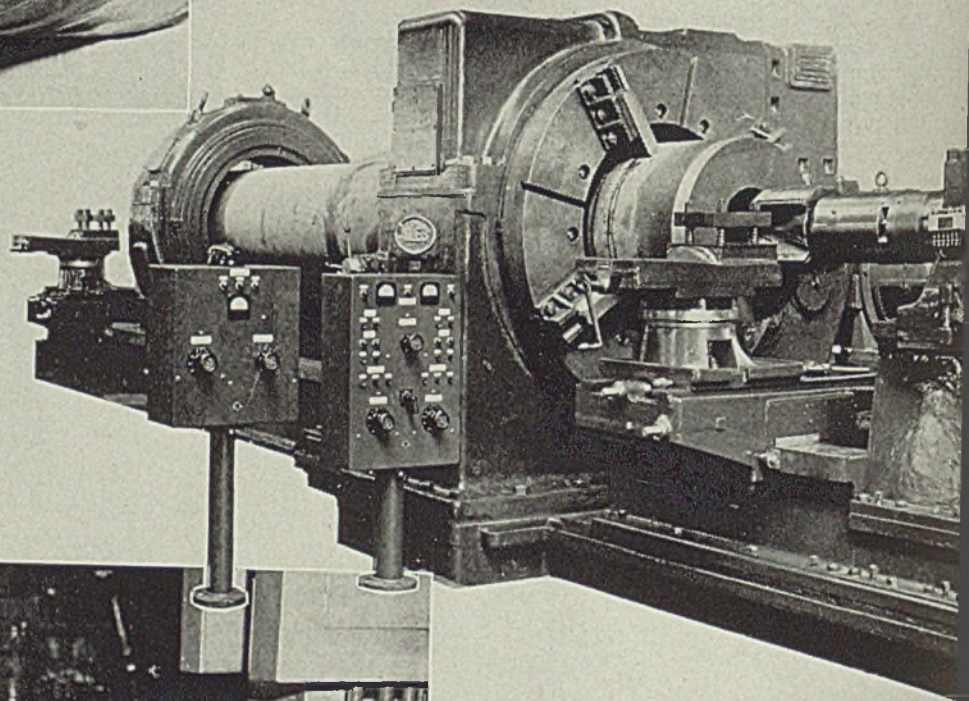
Special machine, above, for facing and boring large guns: Cross slides are provided at each end of machine so both ends of gun can be faced in this unit. Note extremely heavy mountings to support the weight of the work: Also grip in foreground and nearby control panels are part of mechanism employed to revolve the huge piece of steel. Part of breech boring tool also can be seen here
